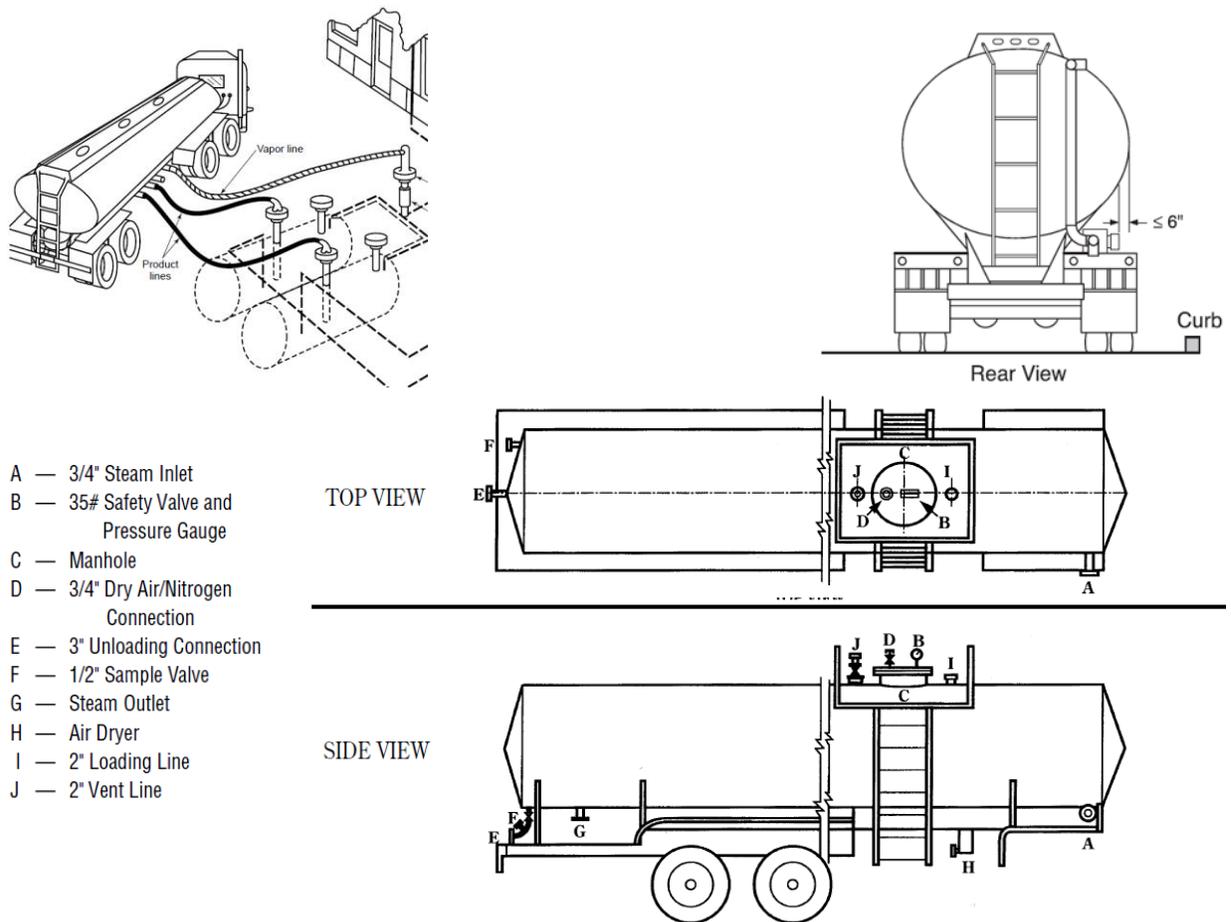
Drawings of multiple tanker trucks with horizontal unloading valves [1, 2].
